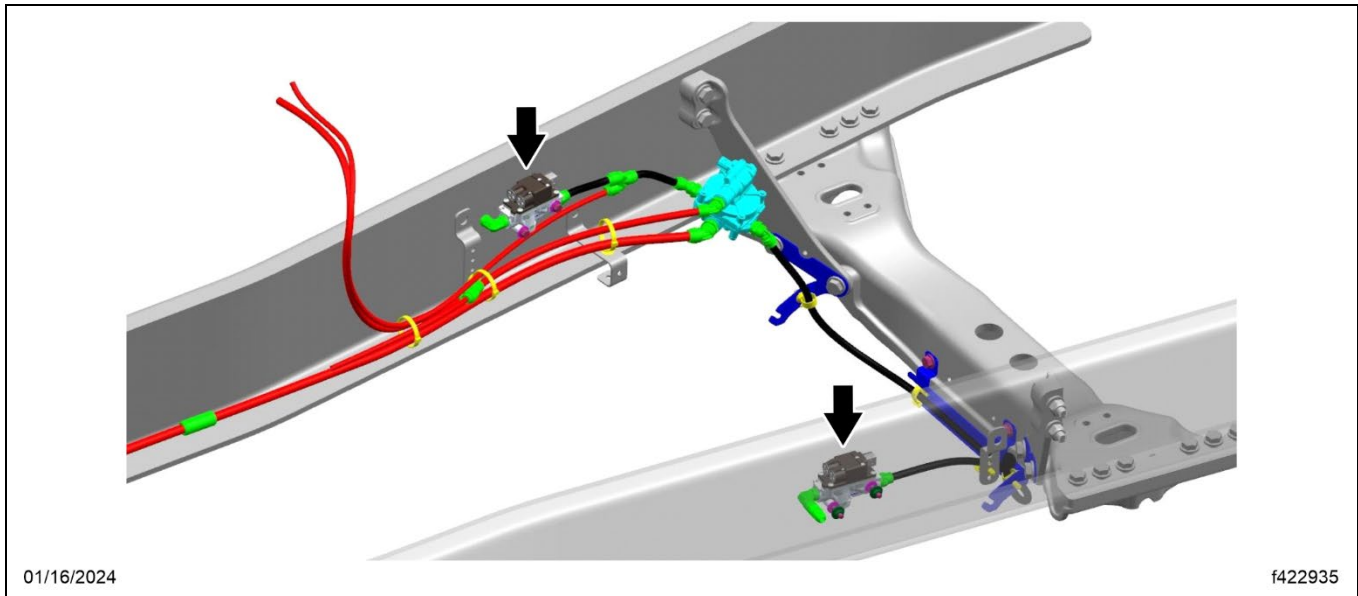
, Modulator Valve Mounting Inside the Frame Rails
